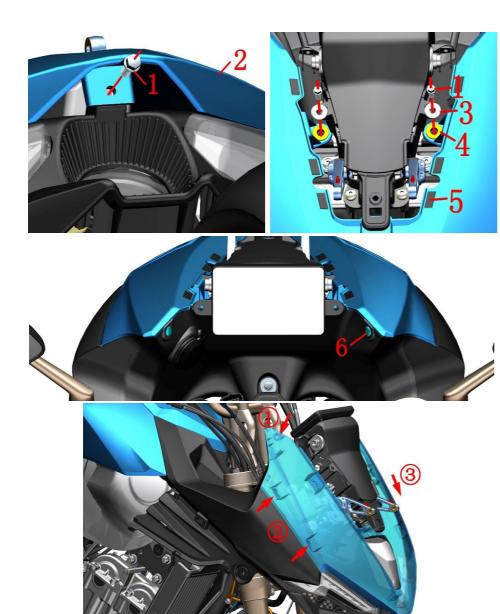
F	FRONT FORK	Head cover panel assembly	CHK	401
